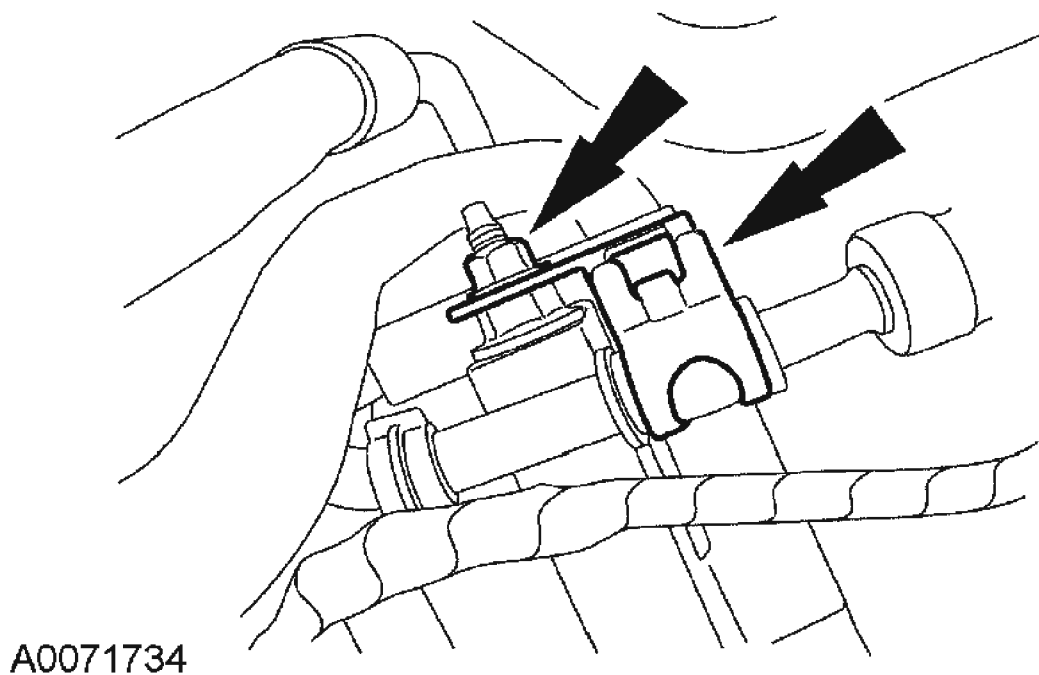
Removing Nut And Detaching PSP Tube Bracket
